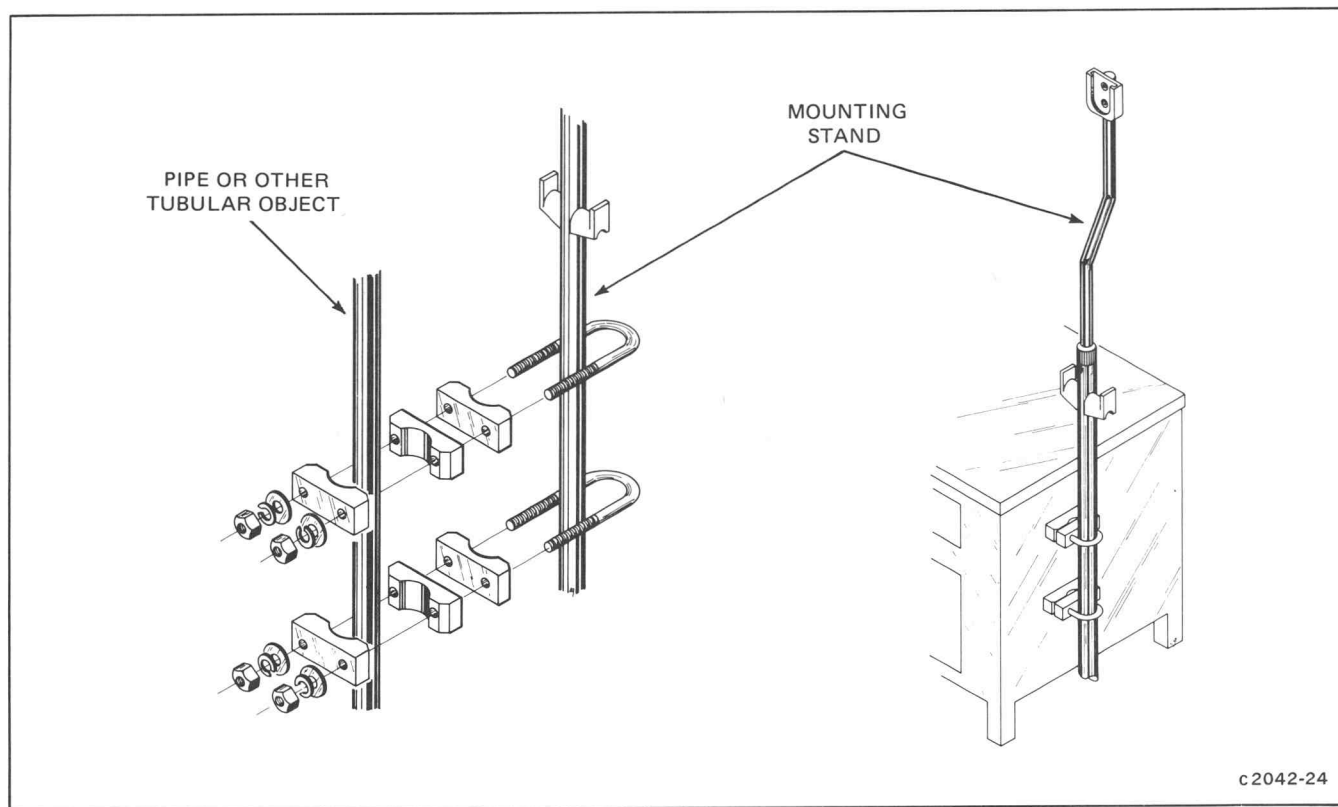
Installing mounting stand to tubular object (pipe) or cabinet side.
